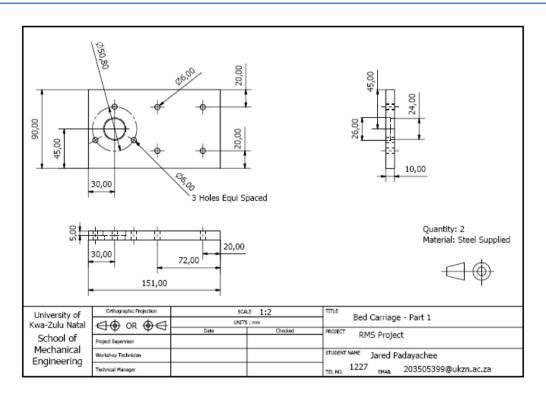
Supporting Plate for Slide/Carriage Mechanism
